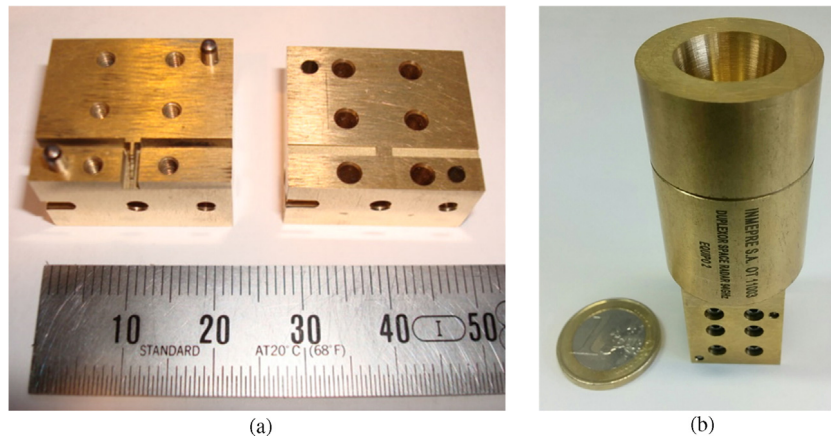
(a) Two brass blocks (body and cover) of the septum-OMT manufactured by electrical discharge machining (EDM). (b) Manufactured waveguide duplexer composed of the septum-OMT and the conical horn.
